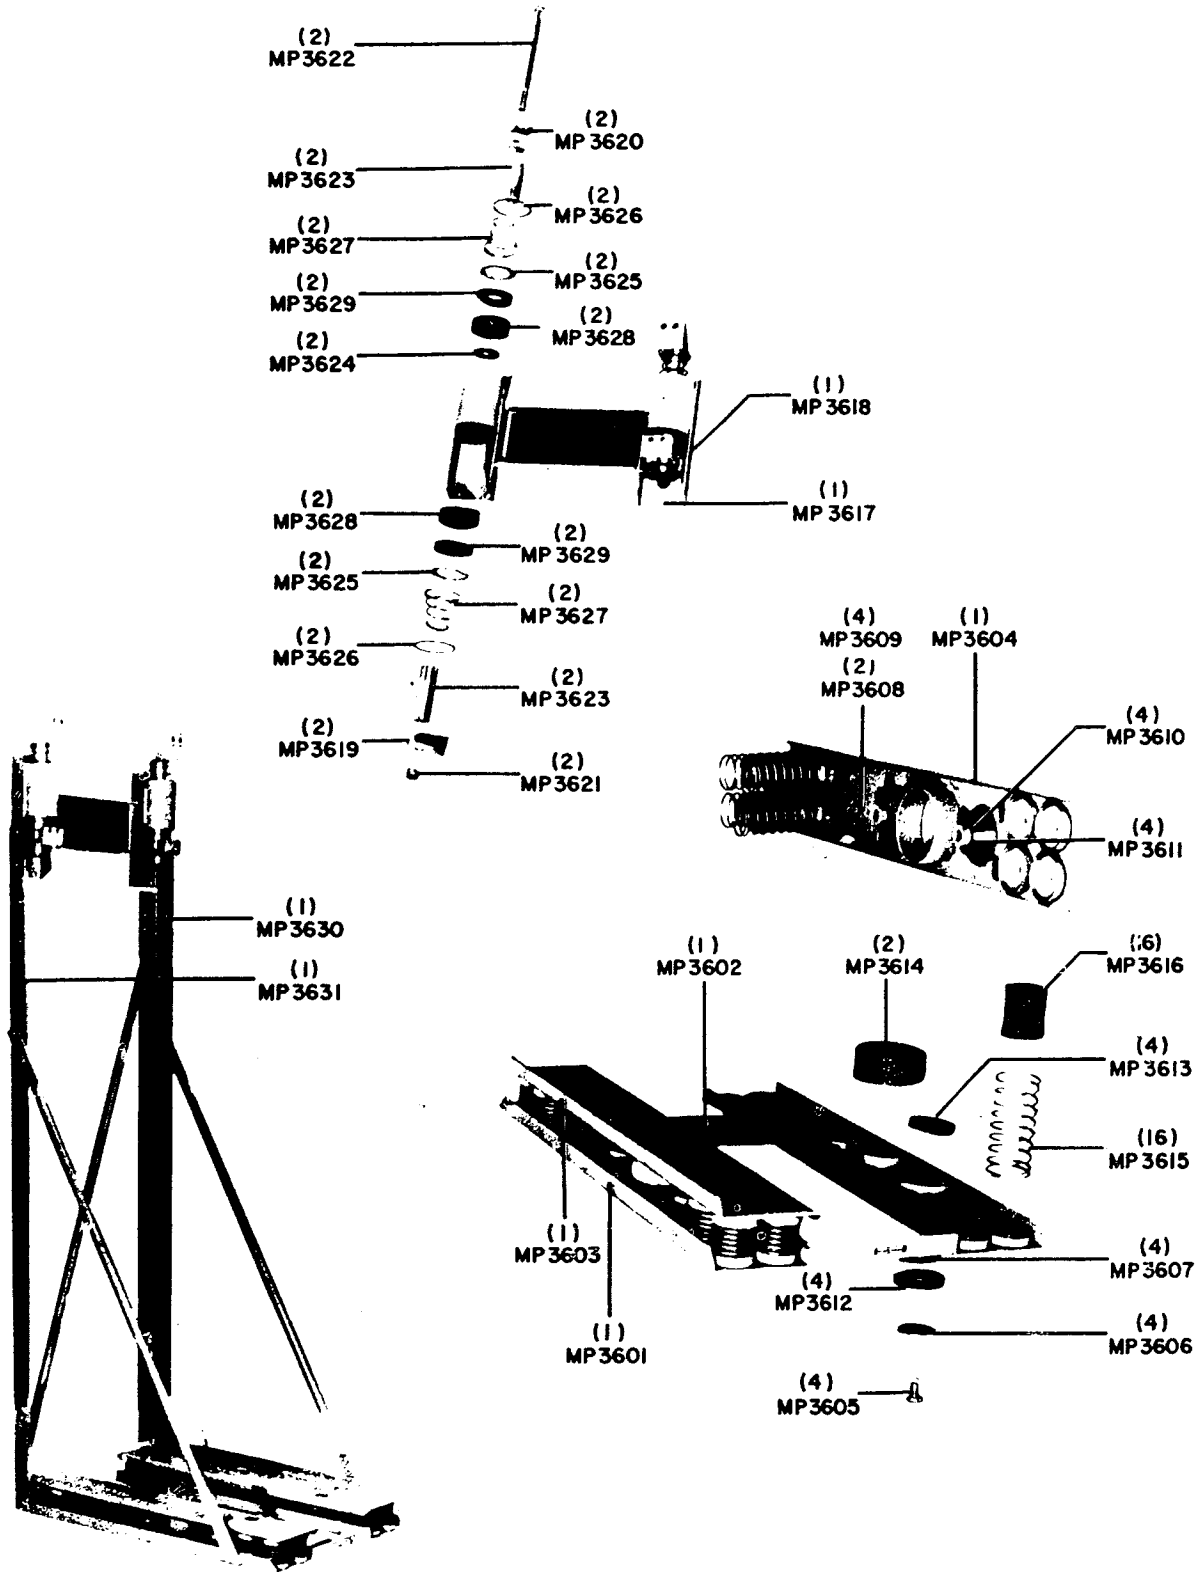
Mounting MT-2170/WRT, Location of Parts
